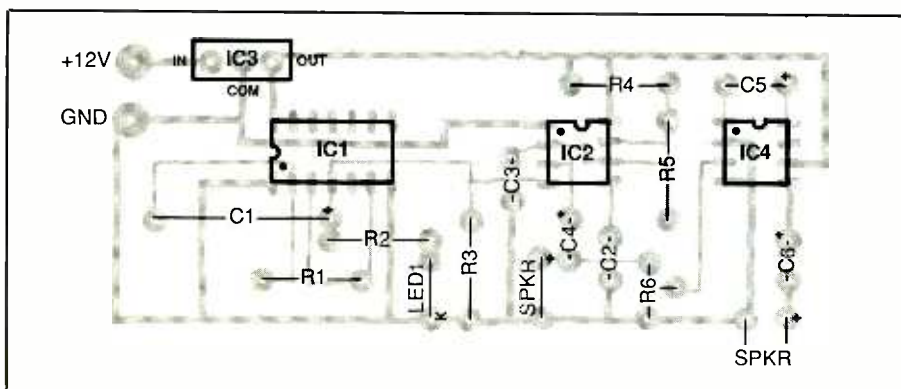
The wiring diagram for the pc board. Use this as a rough guide to component layout on perforated board.
